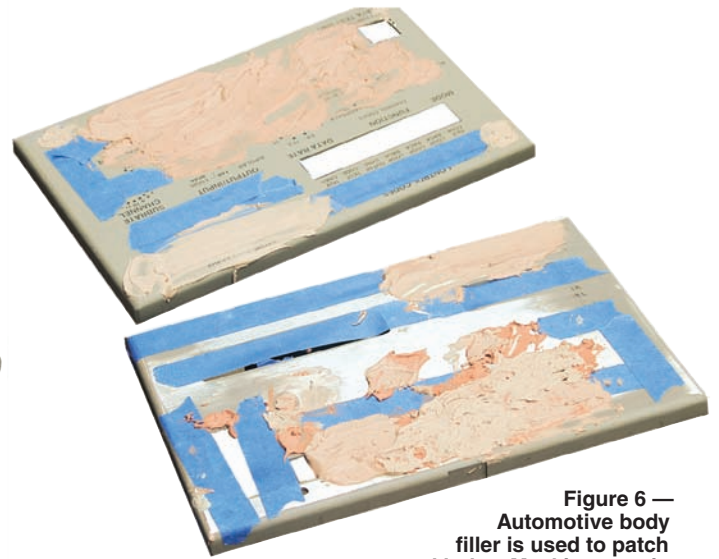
Automotive body filler is used to patch unwanted holes. Masking tape is used on the reverse side of the panel to minimize “squeeze-out” of excess filler.
